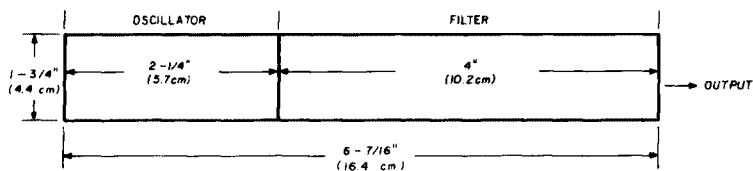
Layout of the assembly containing the second local oscillator and the oscillator filter, FL501. This unit is 1 3/4 inches (45mm) high; the increased size is needed to minimize detuning of the filter. Holes, 1/4 inch (6.5mm) in diameter, are provided in the top for tuning up the oscillator and filter.
